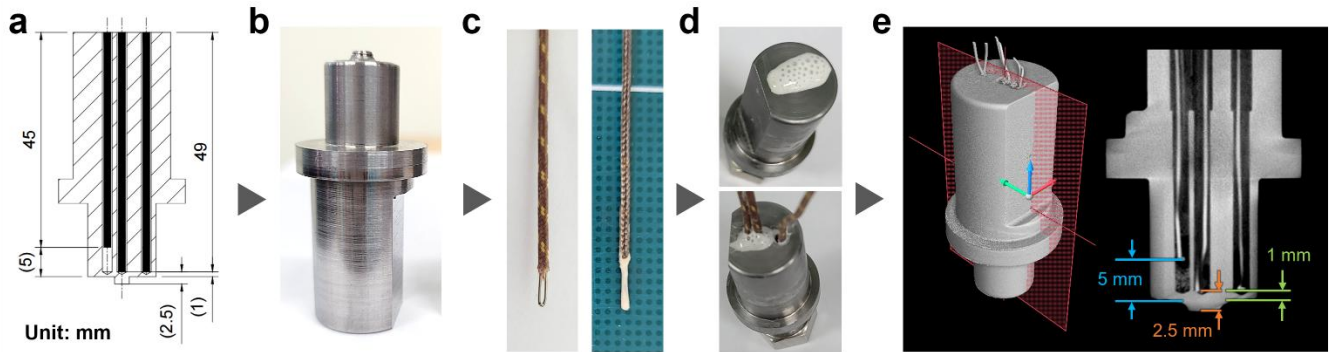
Design and fabrication of a thermocouple-integrated friction stir welding (FSW) tool. a Design of the FSW tool with thermocouple holes. b The machined FSW tool. c Coating of thermocouple junction bead and bare wires using highly heat conductive and electrically insulative adhesive. d Pre-injection of the adhesive into the thermocouple holes and insertion of thermocouples. e Validation of thermocouple positions using μCT image.
